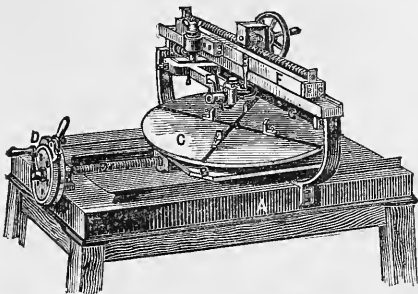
Ruling Machine. A. Foundation. B. Bed Plate. C. Revolving Plate. D. Feed Wheel and Screw. E. Tool. F. Carriage. G. Wave Roll.
